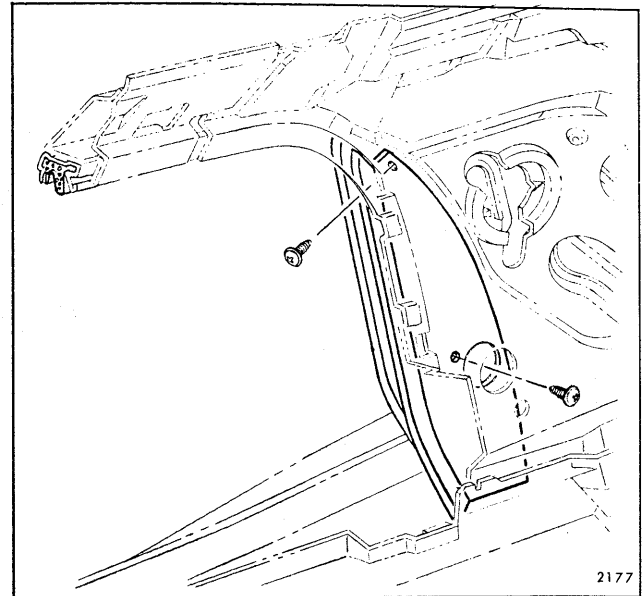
Rear Quarter Window Glass Run Channel - "B-47" Style
